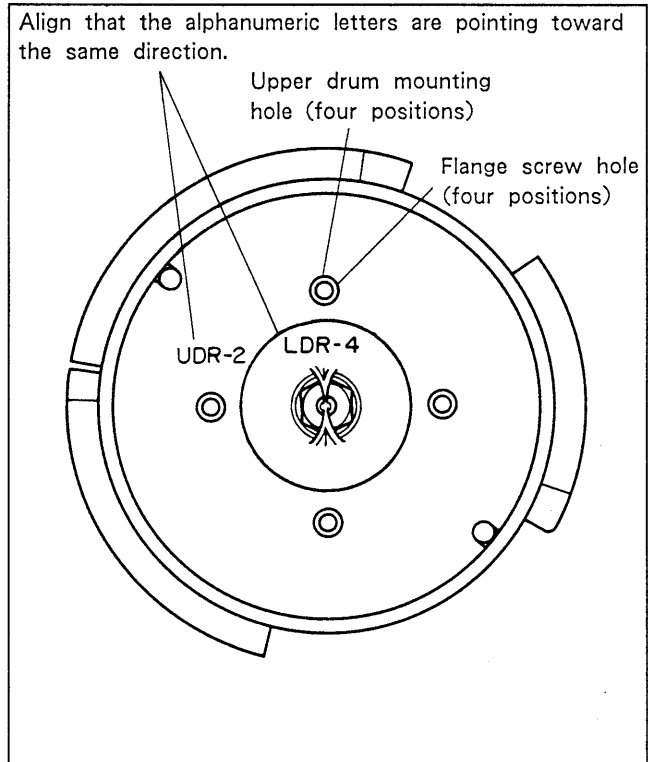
Upper Drum Installation (Aligning Positions)
